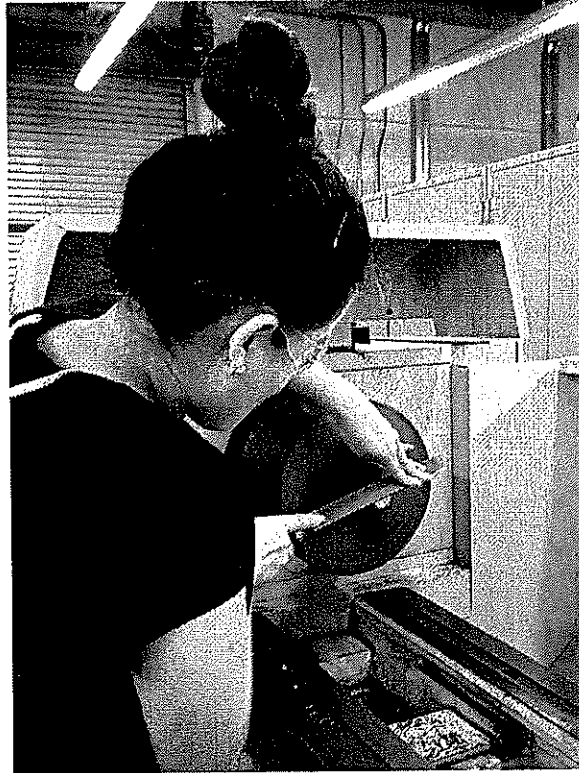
The edge 1" diameter side of the shaft is being chamfered with a file at a 45° angle.
